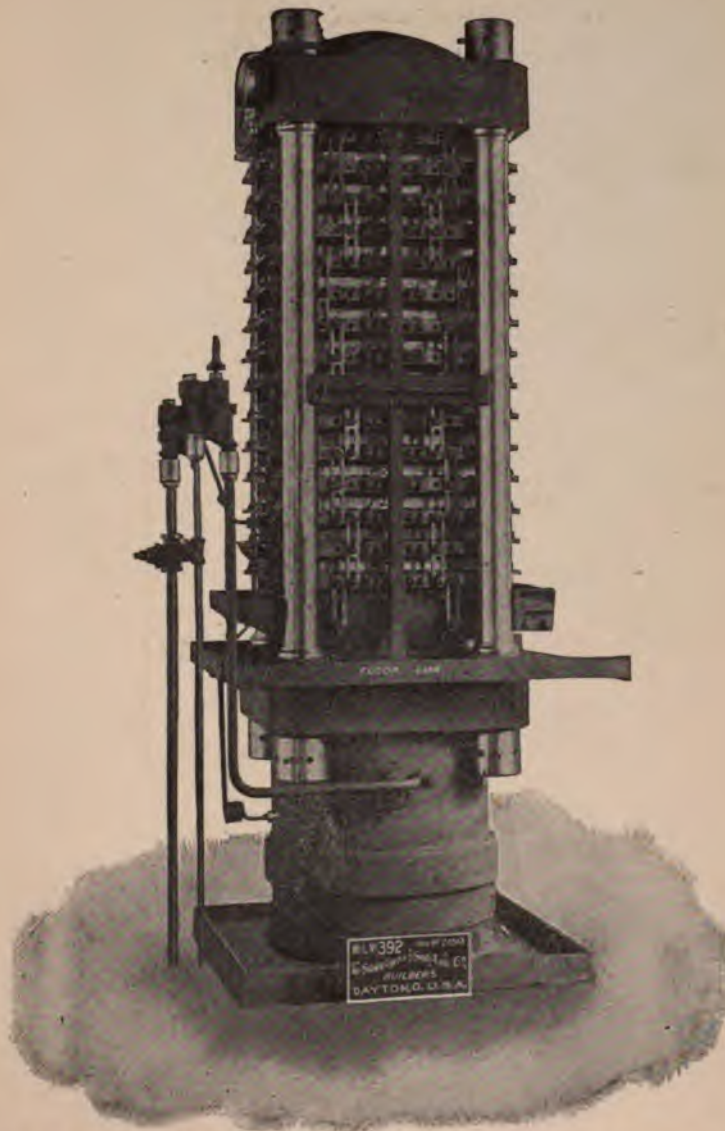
Hydraulic Press with Automatic Change-valve—Side Elevation.
